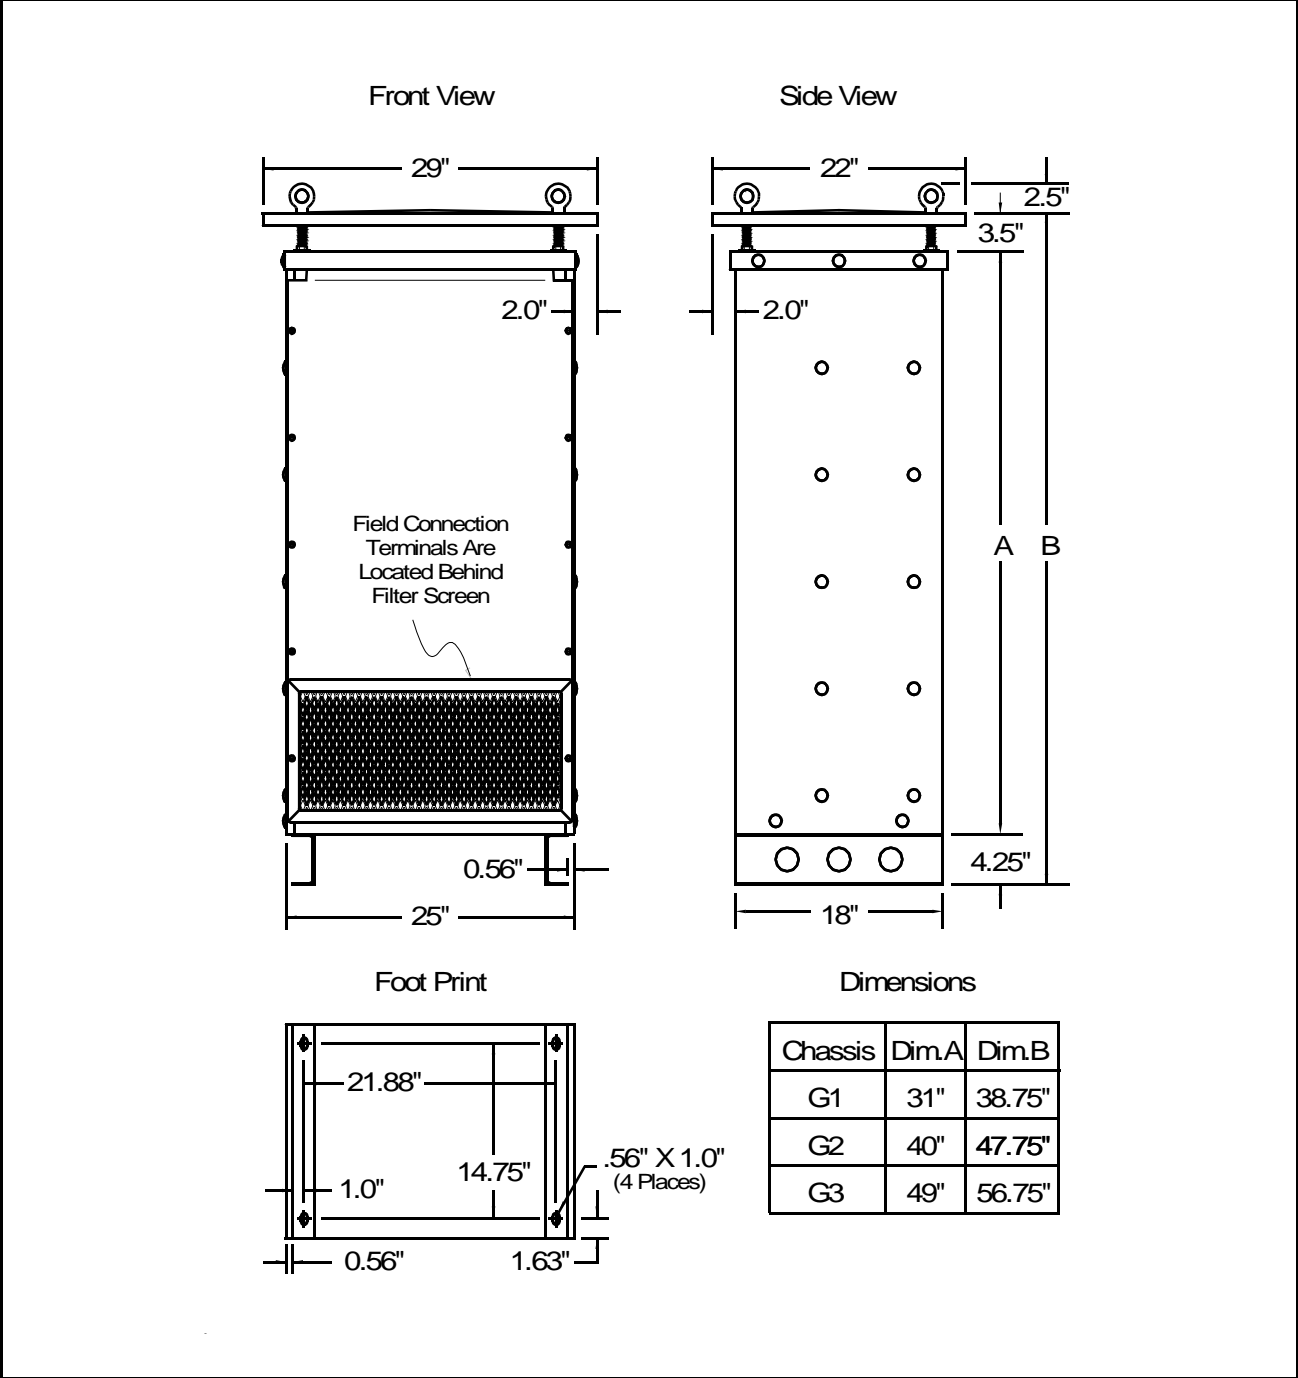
Resistor Braking Kit Enclosure Dimensions (Floor-Mount Models)
